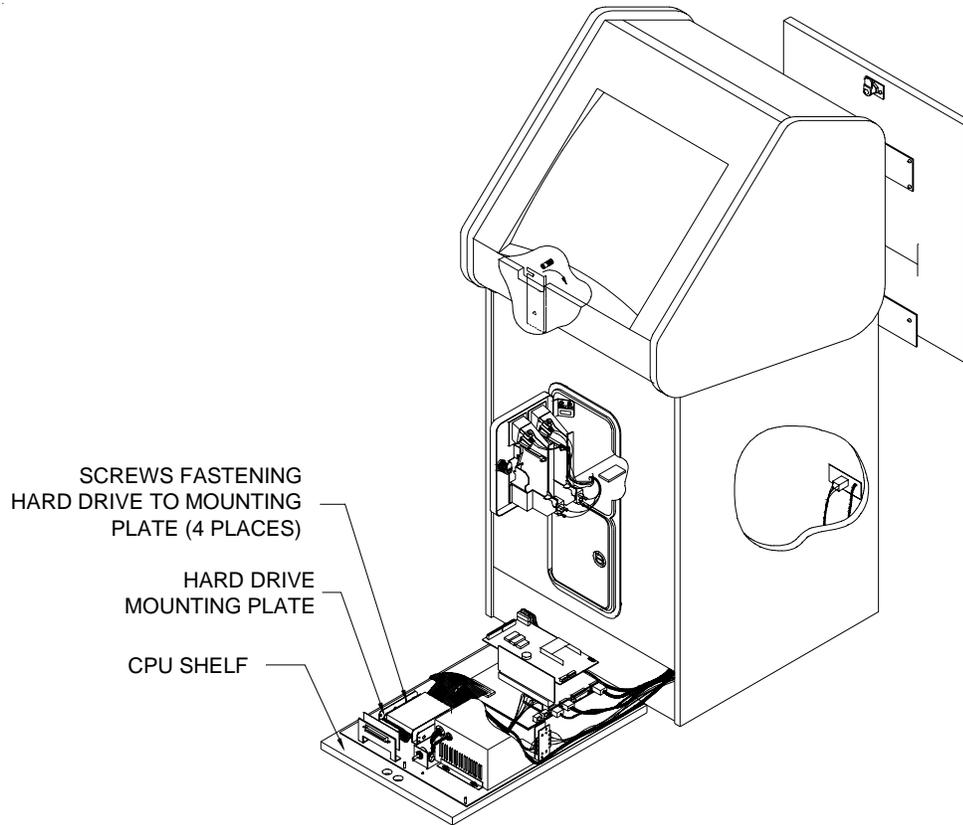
HARD DRIVE REMOVAL - BLUE MAXX UPRIGHT
